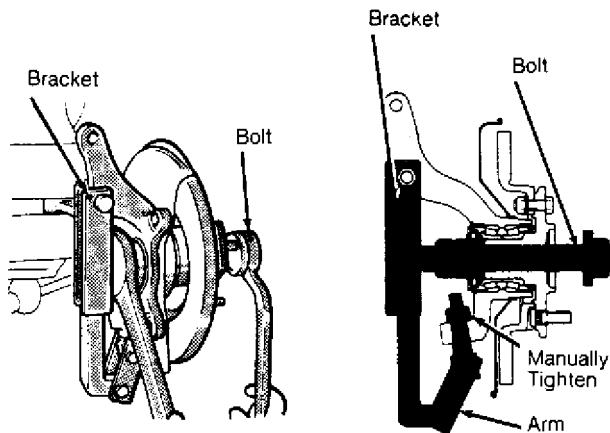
Removing Hub From Steering Knuckle (Colt, Colt 200, Mirage & Summit)
